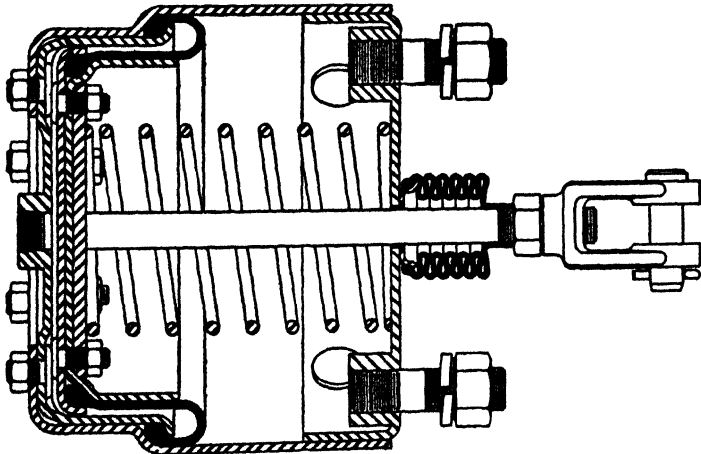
ROTOCHAMBER TYPE OF BRAKE CHAMBER.
